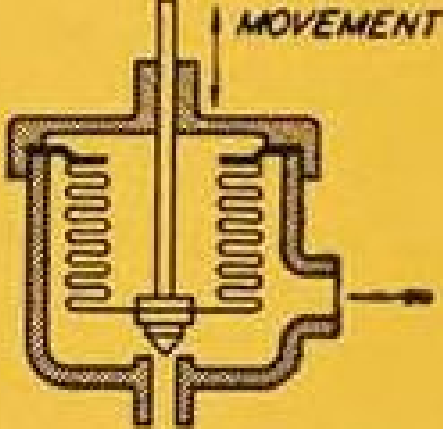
Expansion Chamber—This type of assembly is employed to absorb thermal or pressure expansion. With suitable heads, it would be used to serve as a reservoir for a liquid or gas. Example: Oil reservoir for electrical cable joint.
